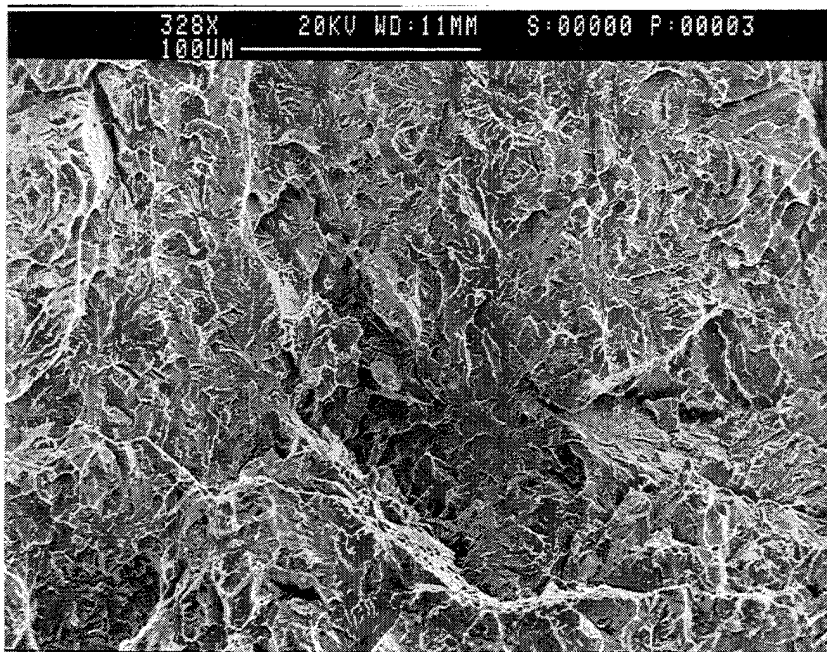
MV2 - GTA Weld using Argon Cover Gas
